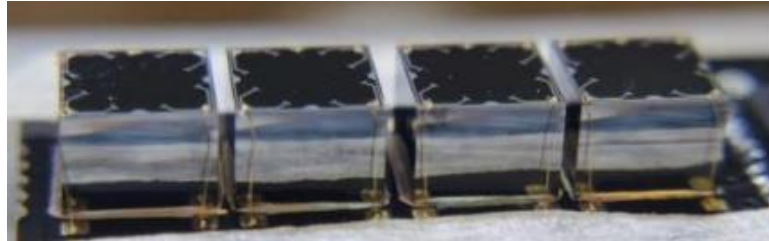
Physical photograph of the planar packaging of the pressure chip.
